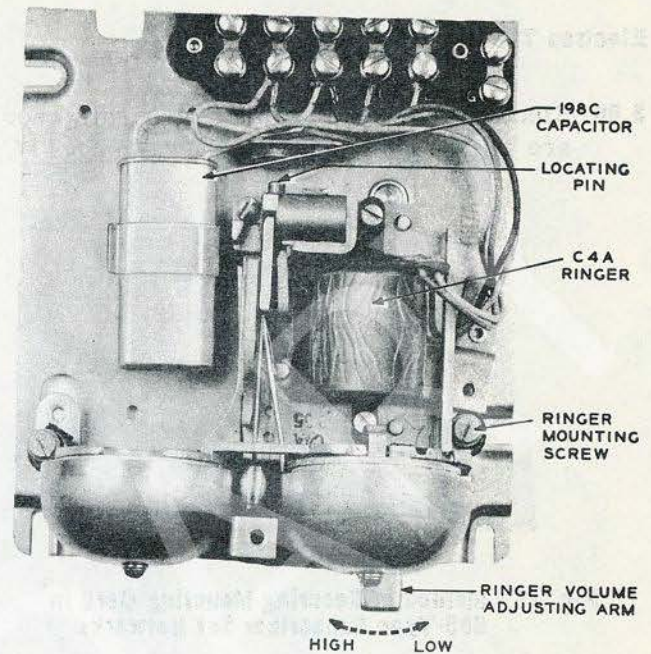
Assembly of C4A Ringer in 685-, 6-, 7-, and 8-Type Subscriber Sets, Front View
